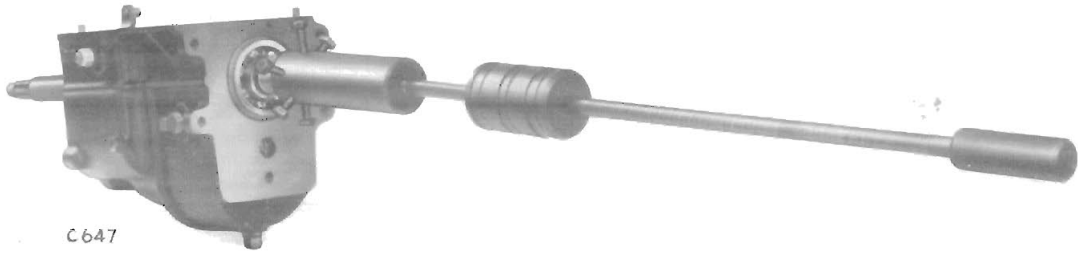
Using Churchill main tool 4235A with adaptor S.4235A-2 to remove input shaft assembly
